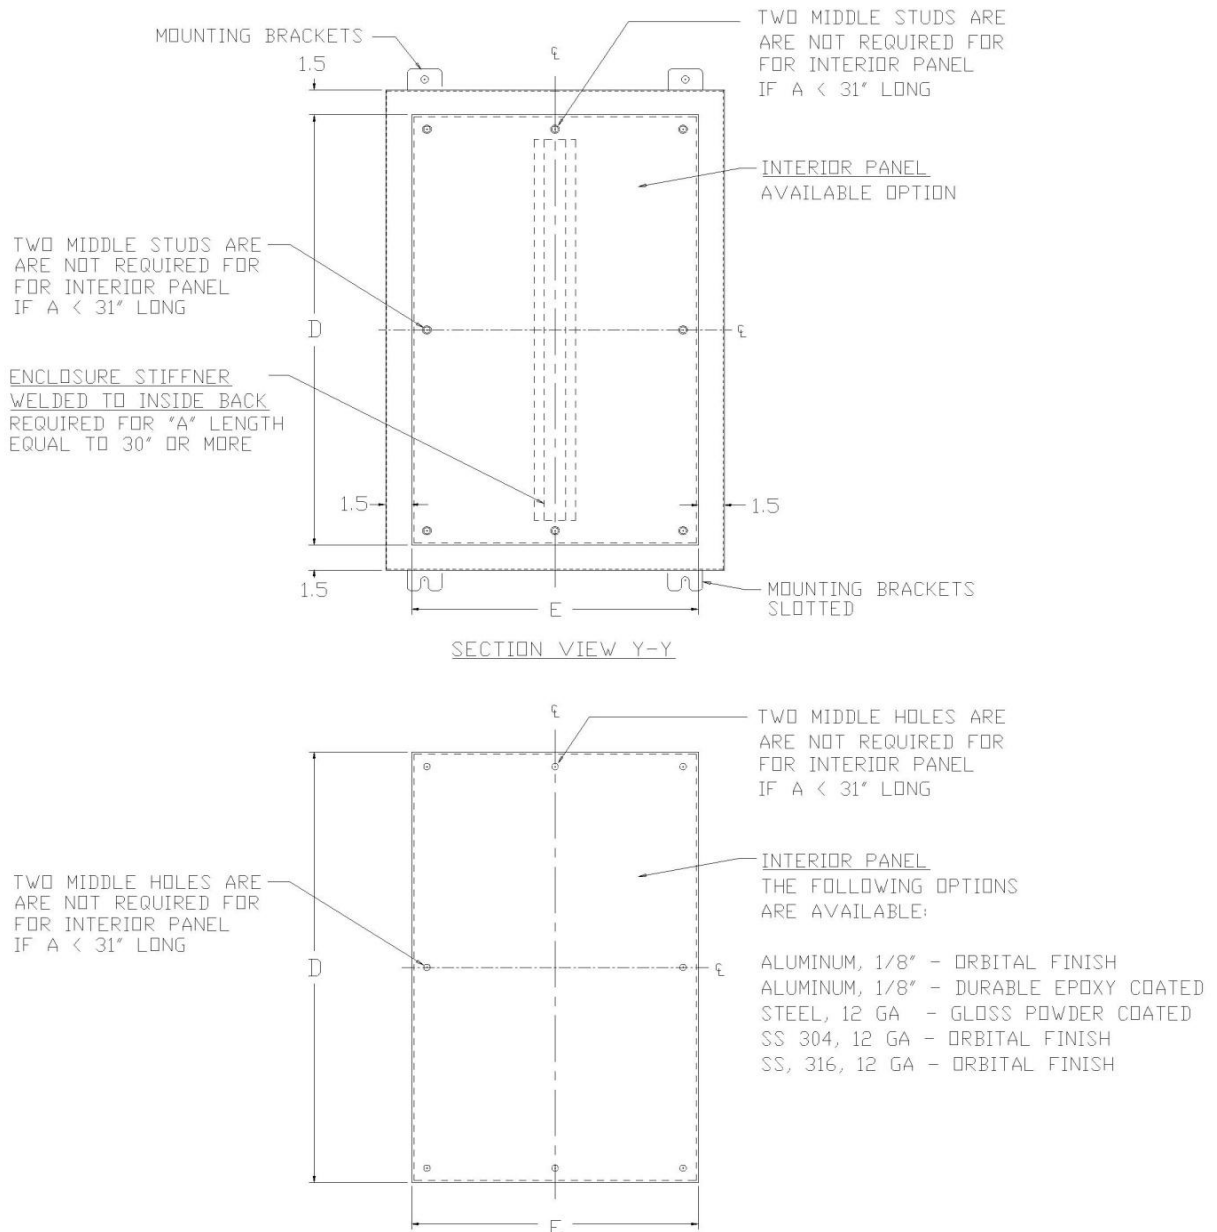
DOOR OPENING & INTERIOR COVER PLATE
